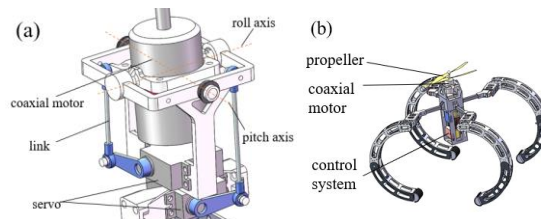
Design of the robot: (a) The connecting rod mechanism is used for motor attitude adjustment; (b) Overall structure of robot.
